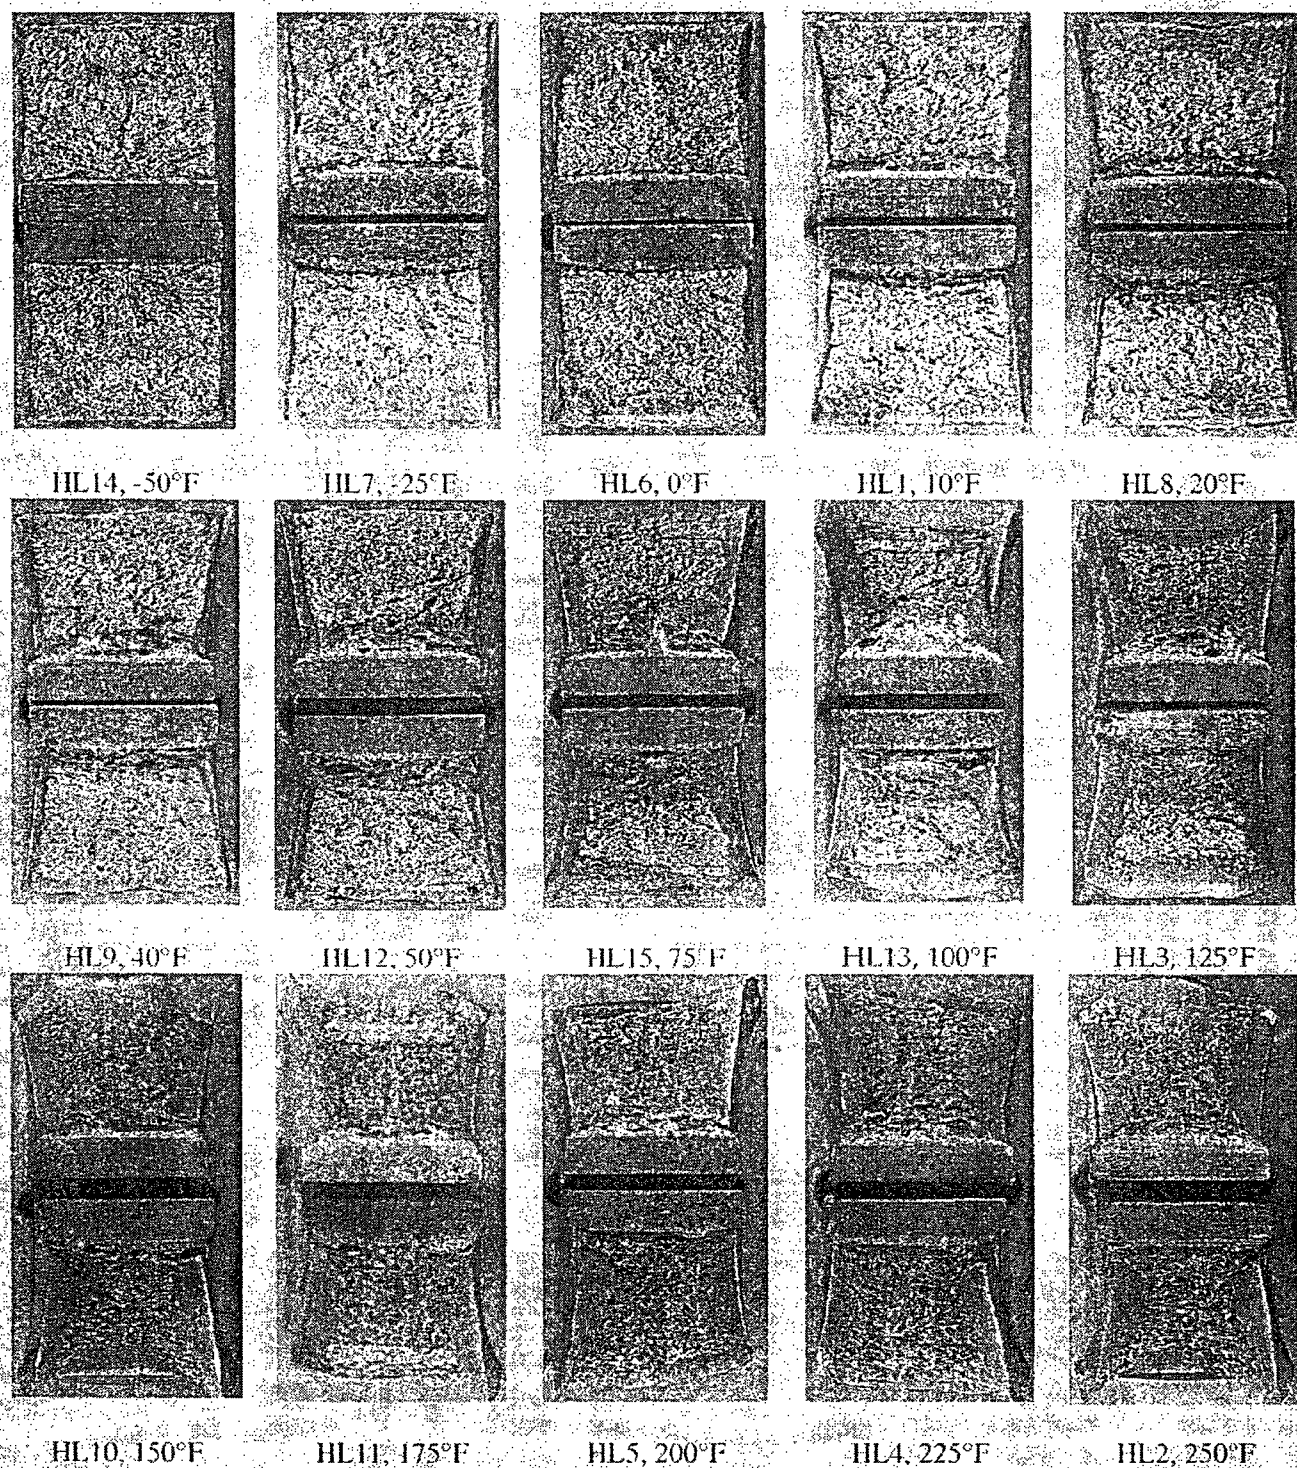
Charpy Impact Specimen Fracture Surfaces for South Texas Unit 2 Reactor Vessel Intermediate Shell Plate R2507-1 (Longitudinal Orientation)
